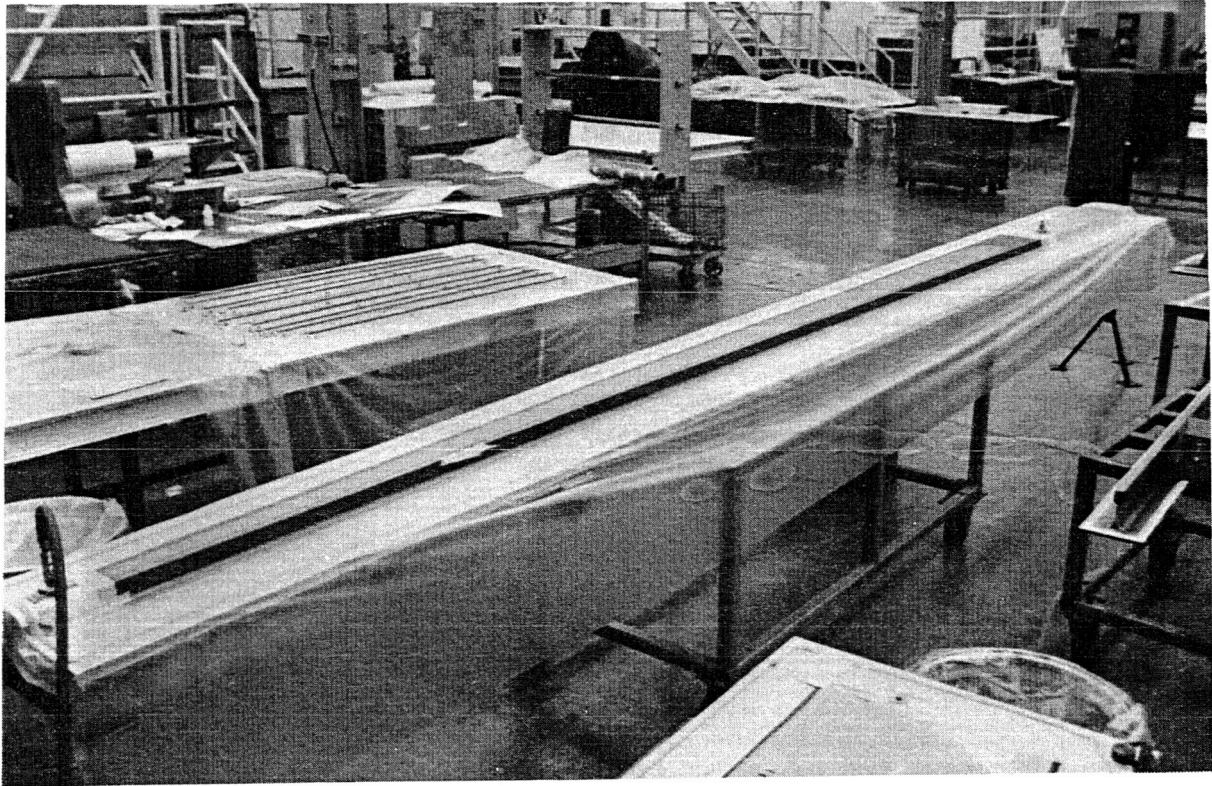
Front-Spar Assembly Tool with Outboard Spar Detail
